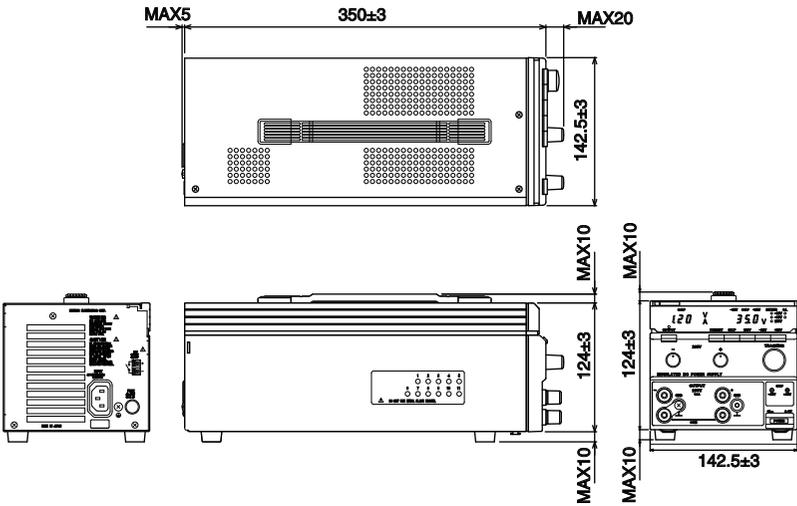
PMM35-1.2DU Dimension Diagram Unit: mm
